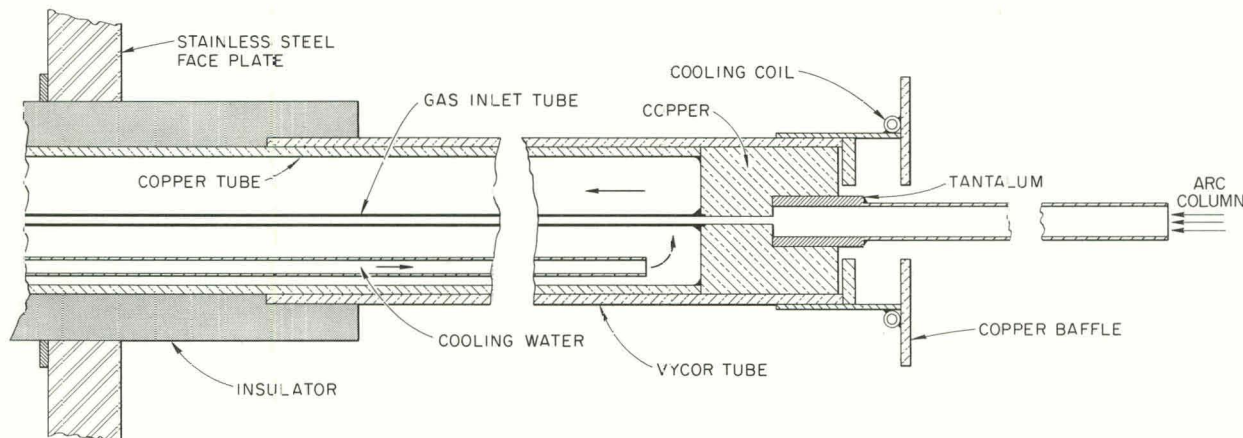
Cathode Assembly for 120-in. Solenoid.
